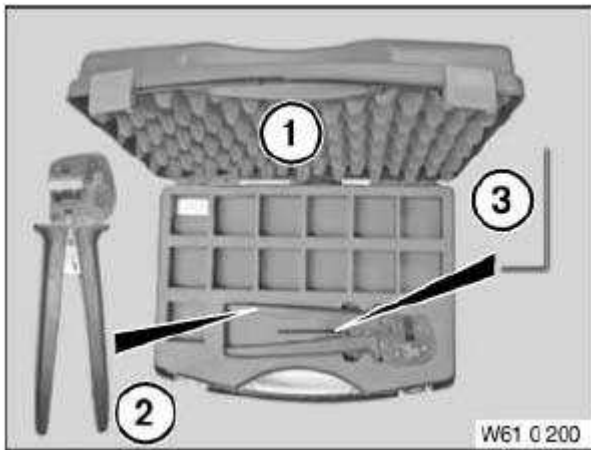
Identifying Crimping Stop Parts (Large Contacts)
